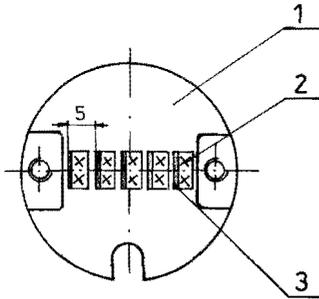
Fuse-link blade contact with arrangement of 5 strips shown. 1-blade contact; 2-fuse-element welding points; 3-fusible strip.
